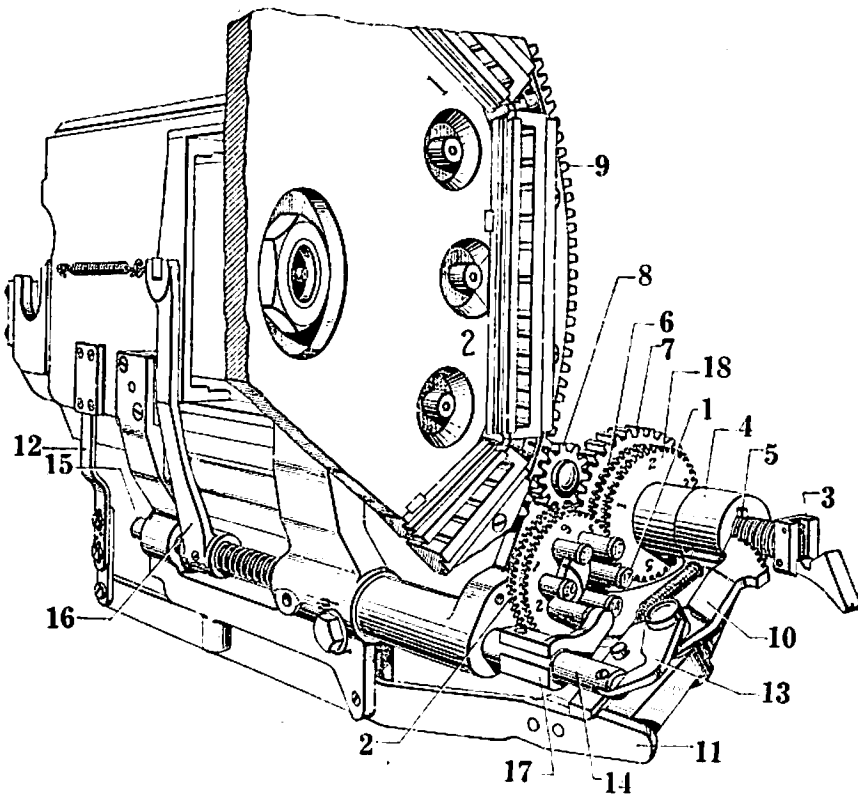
View of the Automatic Ejector Shifting and Selecting Mechanism and related parts in assembly.
